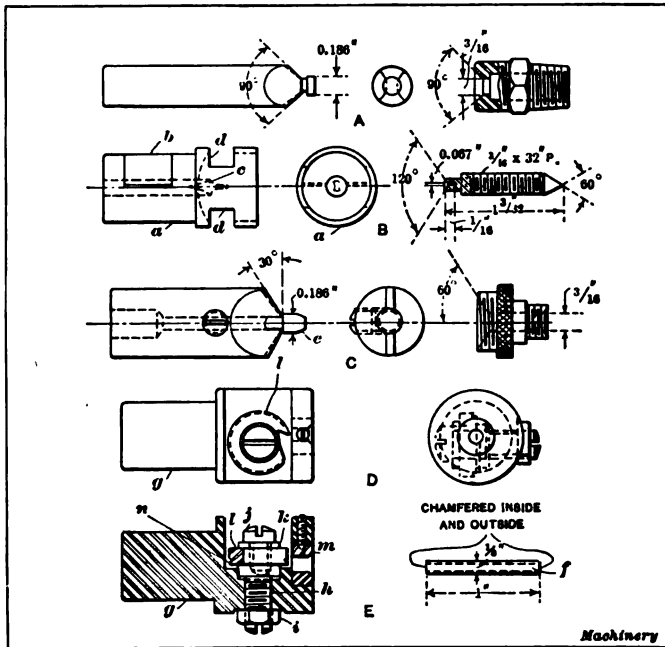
Various Types of Burring Tools and Burring-tool Holders
